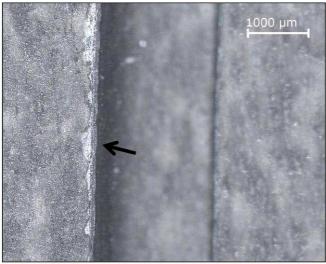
Fracture of aluminium oxide at sharp edge inside mould cavity
